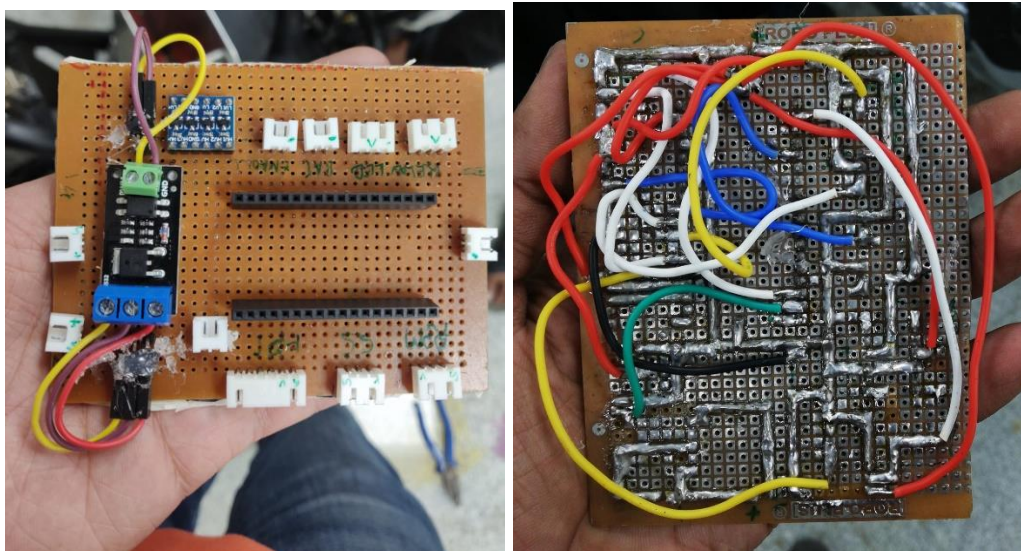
(a): Top side of manufactured board Fig 9(b): Backside of the protoboard
